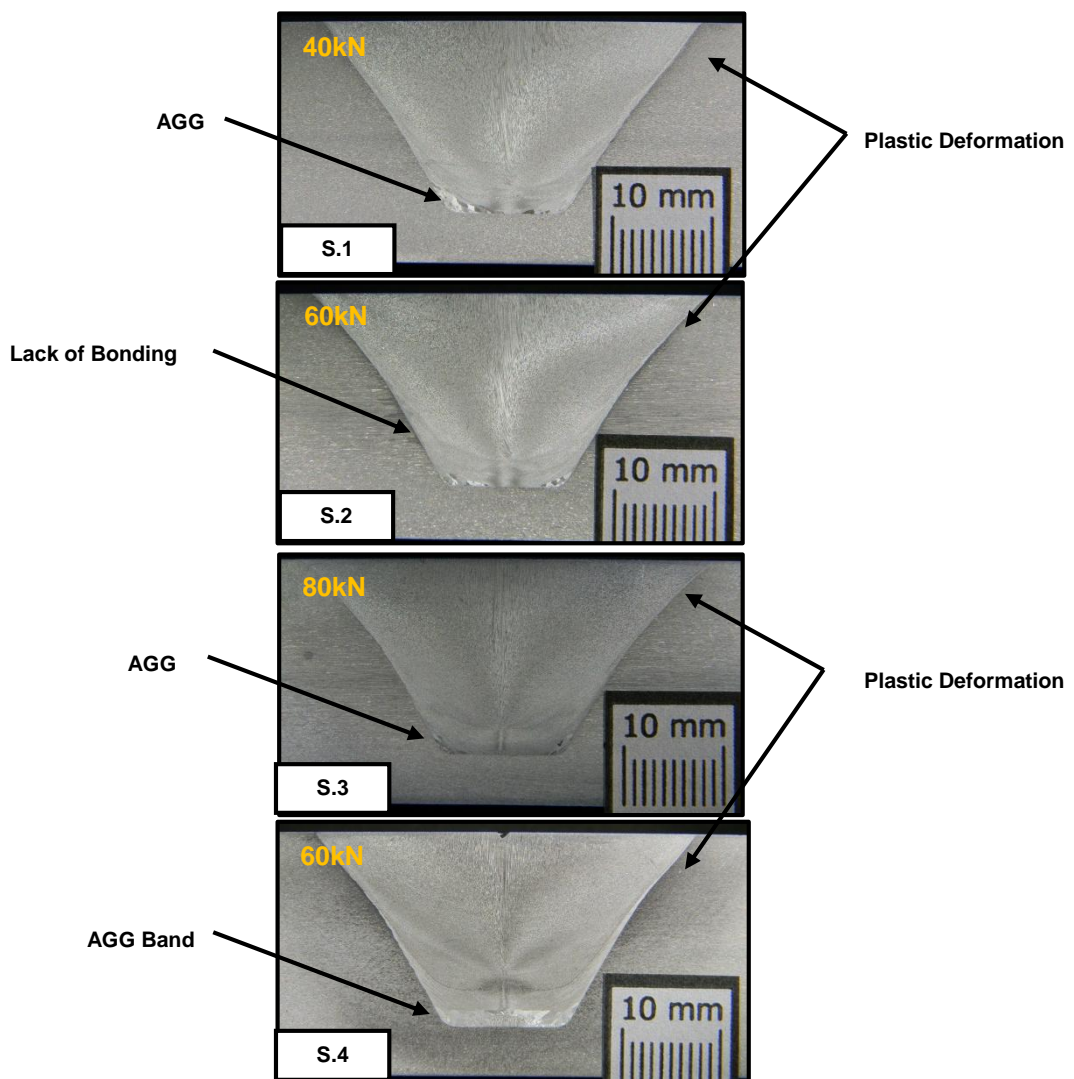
Macrographs of Welds S.1 to S.4
